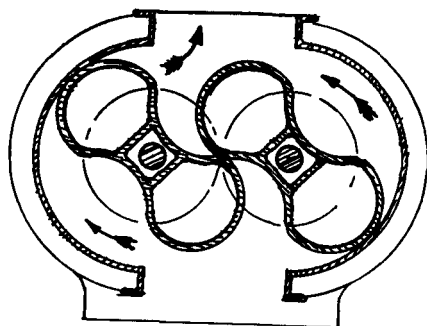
Straight-lobe blower. Courtesy Roots/Dresser.
